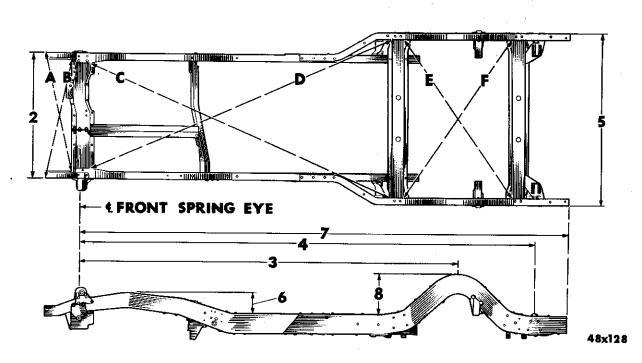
Frame Alignment (B-4-DU and B-4-EU) (Dimensions given in inches)(Refer to Frame Dimensions Chart, page 6)
